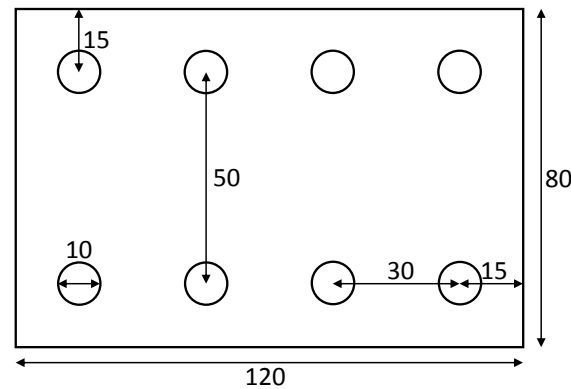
Dimensions of kissing interface blocks in millimeters. Each block is 30 mm thick.
